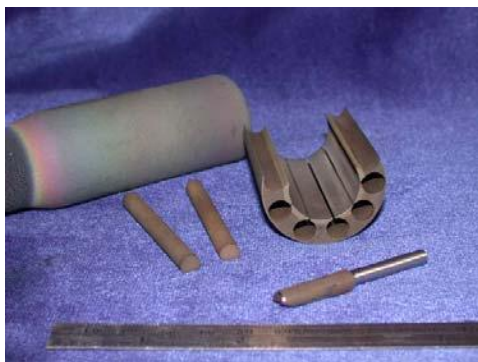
As-sprayed tubular NiTi shape and EDM machined specimens removed from the
